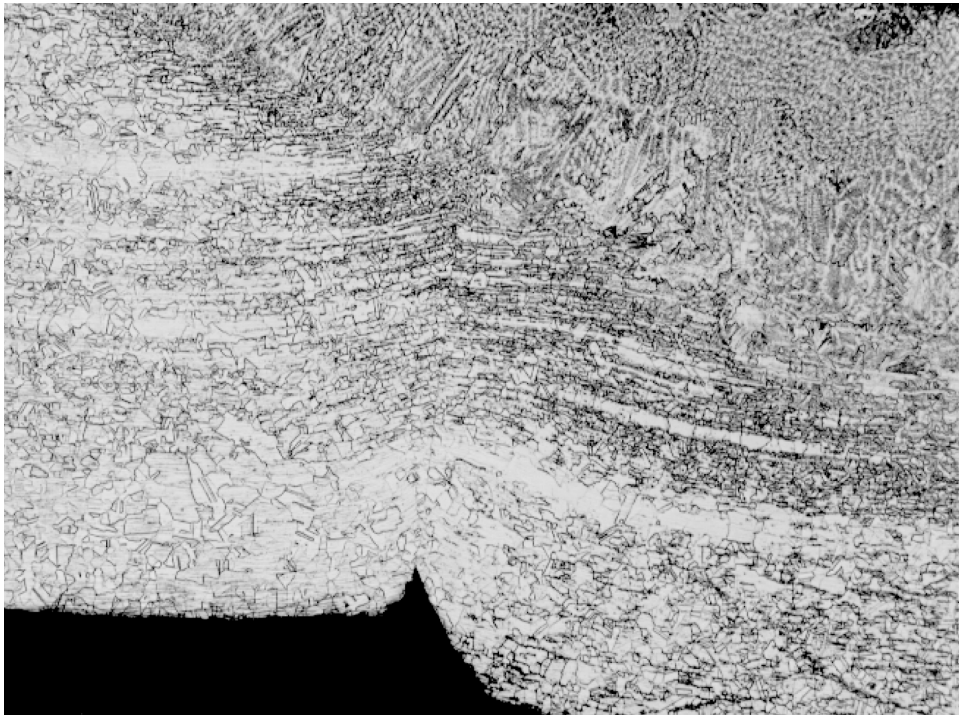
304 SS square butt weld with lack of penetration (sample 1-4-C-2), $\times 50$.
